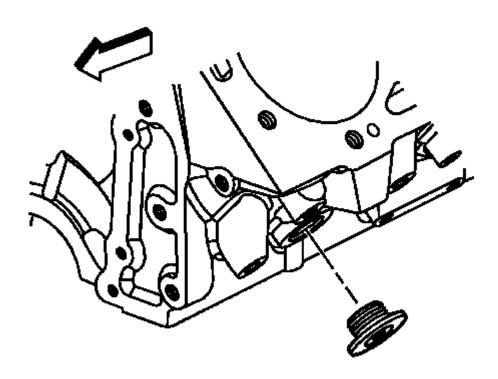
View Of Engine Coolant Drain Hole Plug Courtesy of GENERAL MOTORS CORP.
